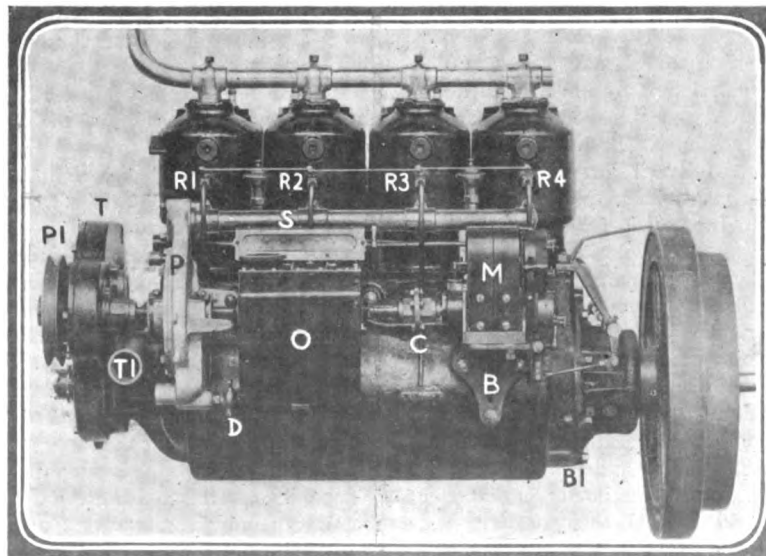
Side view of the motor, showing the water pump, oiler and magneto
